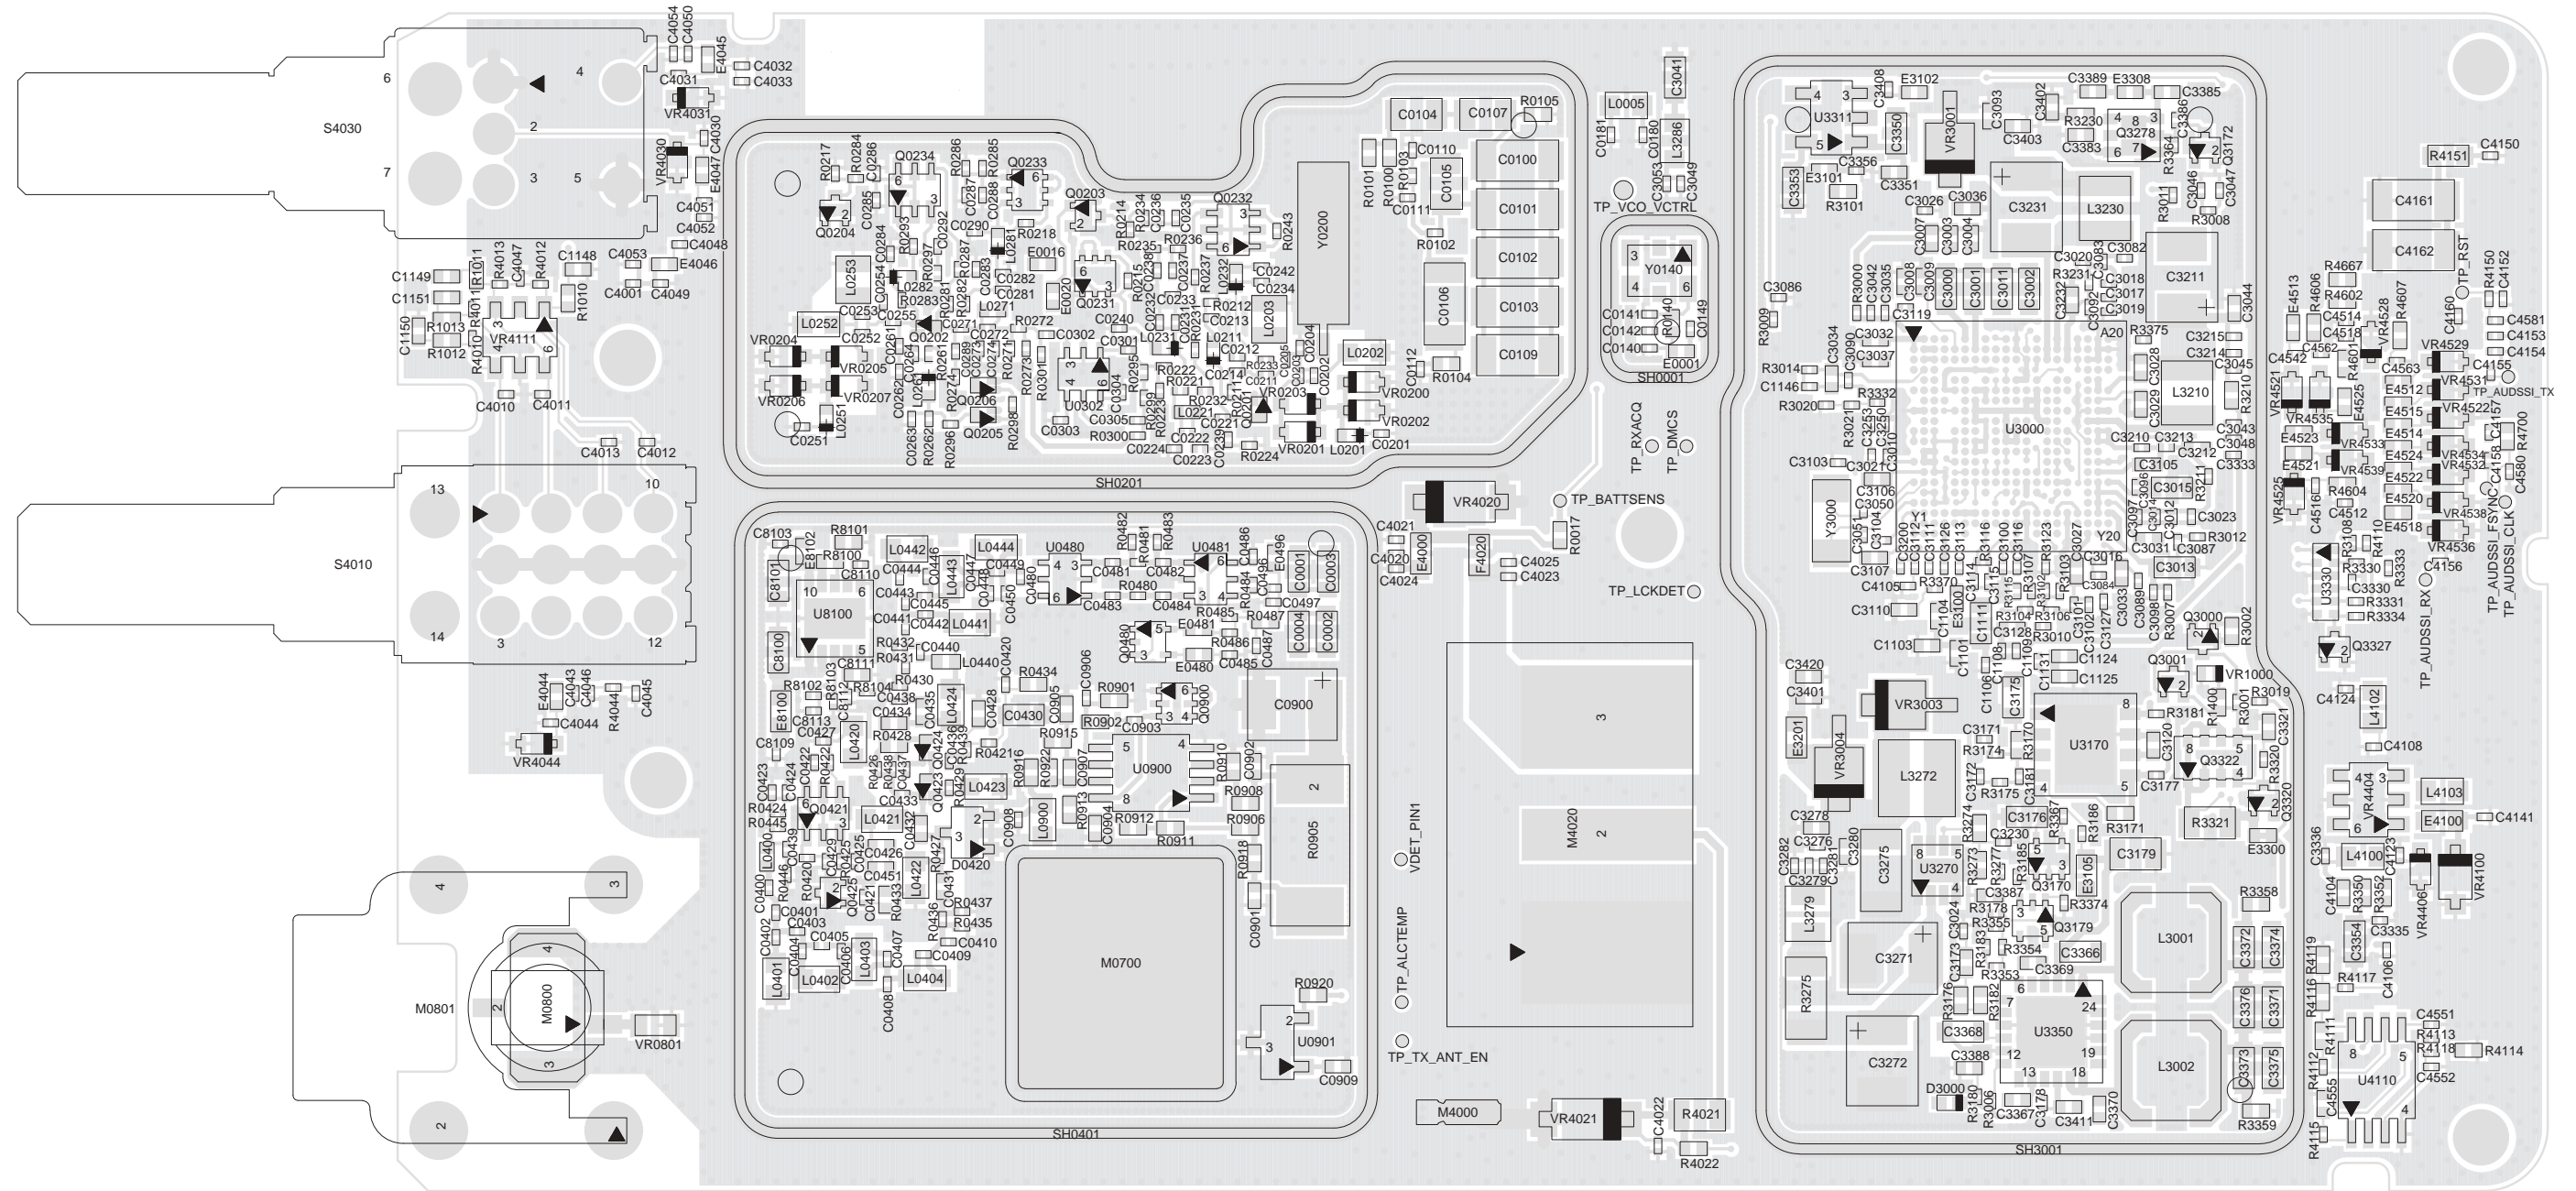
Main Board UHF Top Side PCB No. PC000813A01\_AB
